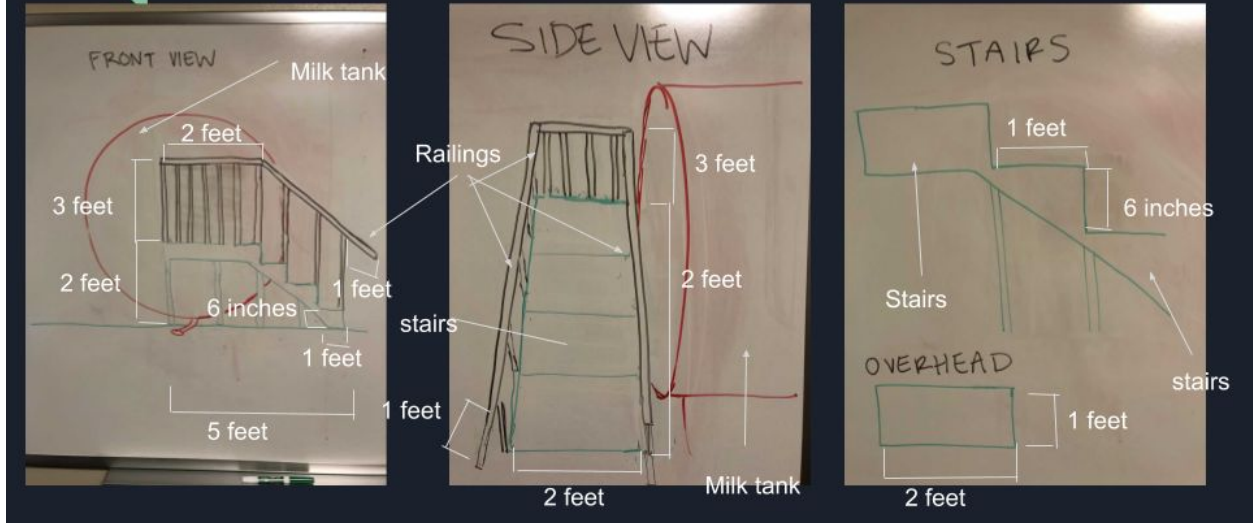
The Staircase: This design is a traditional staircase with an exposed bottom to ensure no obstruction at the access point. Inclined stairs with a platform in the center provide access to controls.
